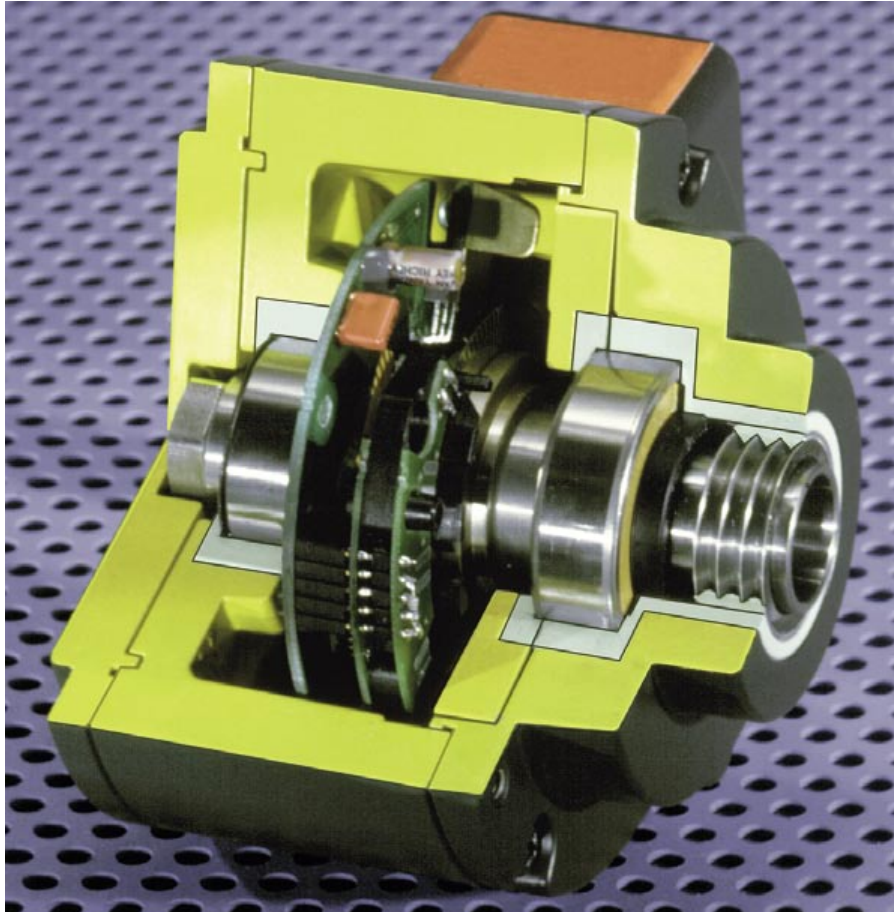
HeavyDuty-Technology at its best: solid aluminium housing, generously dimensioned ball bearings with an insulated mounting, sensor electronics with power transistors, labyrinth seal
